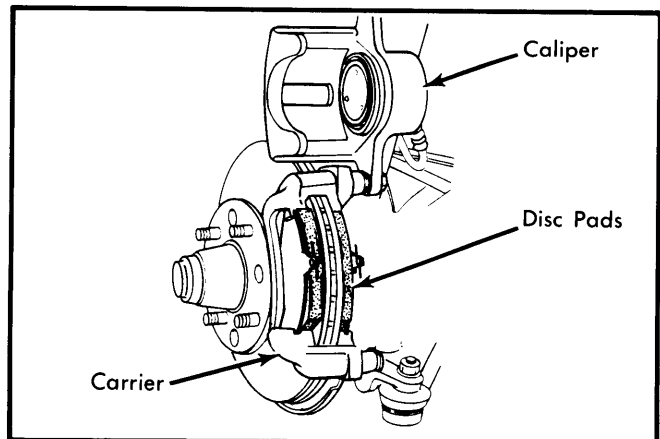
Audi 4000 and Turbo Front Disc Pad Removal
